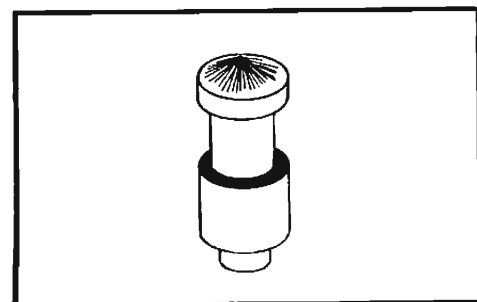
Guidepost used in conjunction with "outboard" head mounting.
